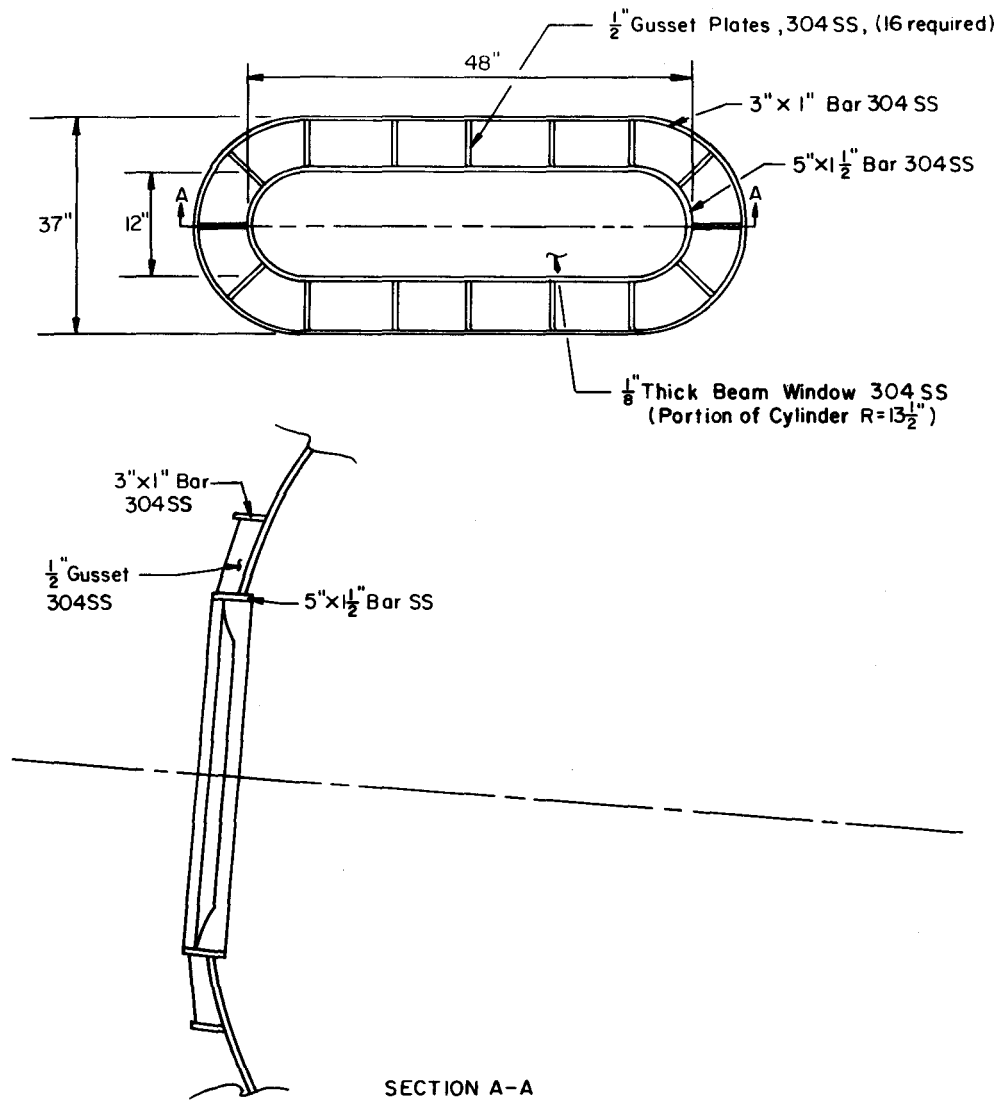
PROPOSED MODIFIED BEAM WINDOW DESIGN
